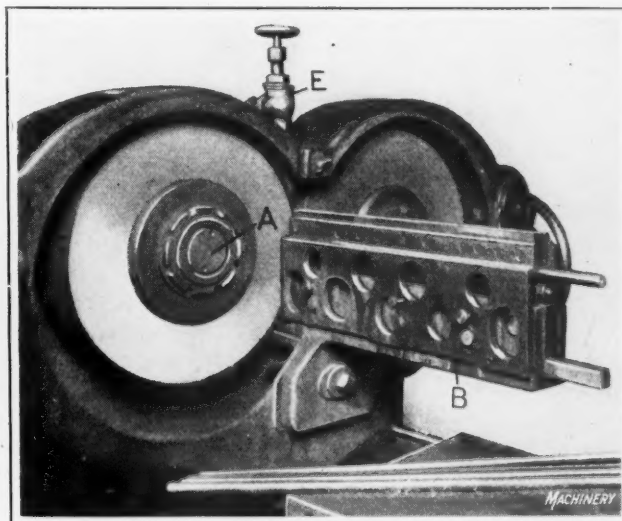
Operating Side of Machine, with Grinding and Regulating Wheels exposed—also showing Fixture for grinding Rods
